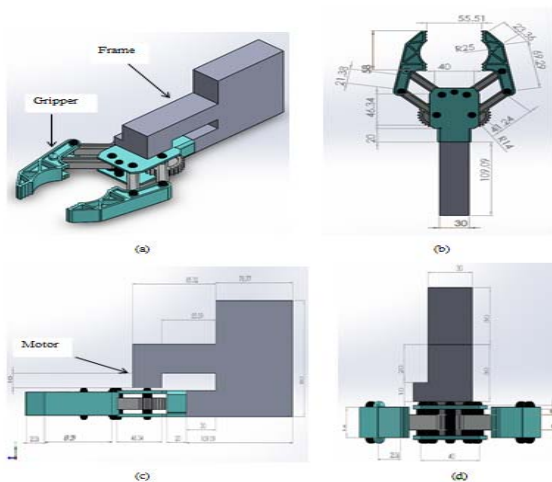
Mechanical drawing of the gripper, (a) isometric view, (b) top view, (c) s.
